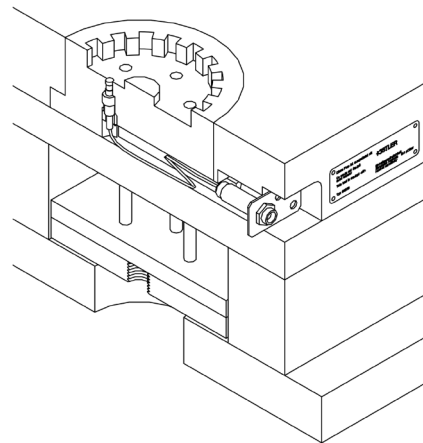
Sensor, cable, connector, mounting plate (Art. No. 3.520.328) and identification label (Art. No. 3.520.899)
